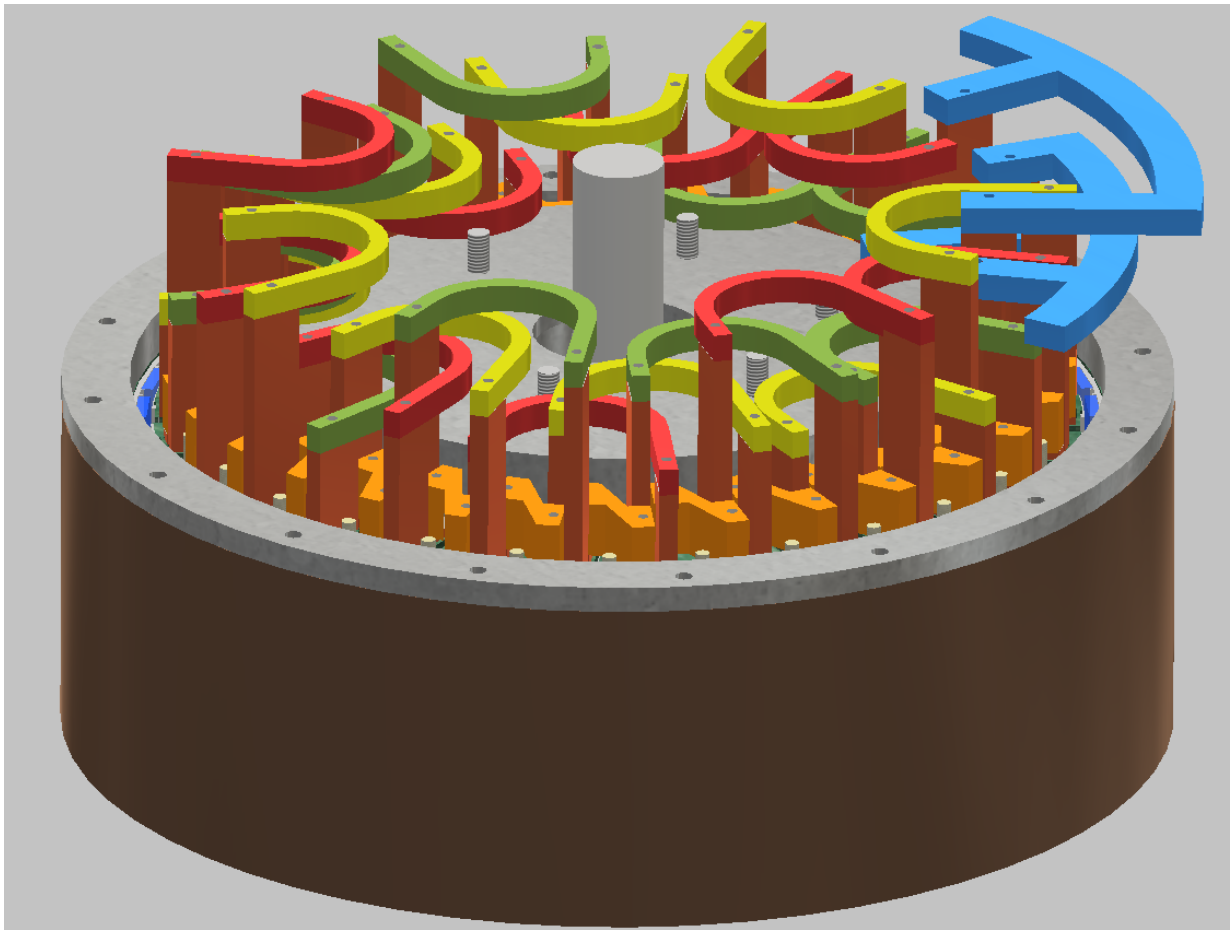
Complete machine assembly of the machine in Appendix B.
